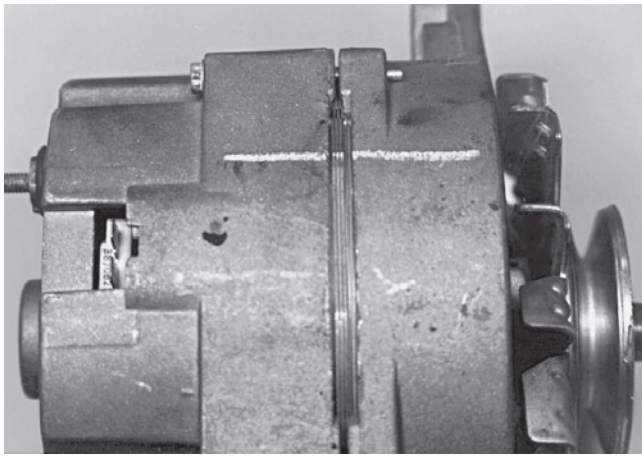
Always mark the case of the alternator before disassembly to be assured of correct reassembly.
